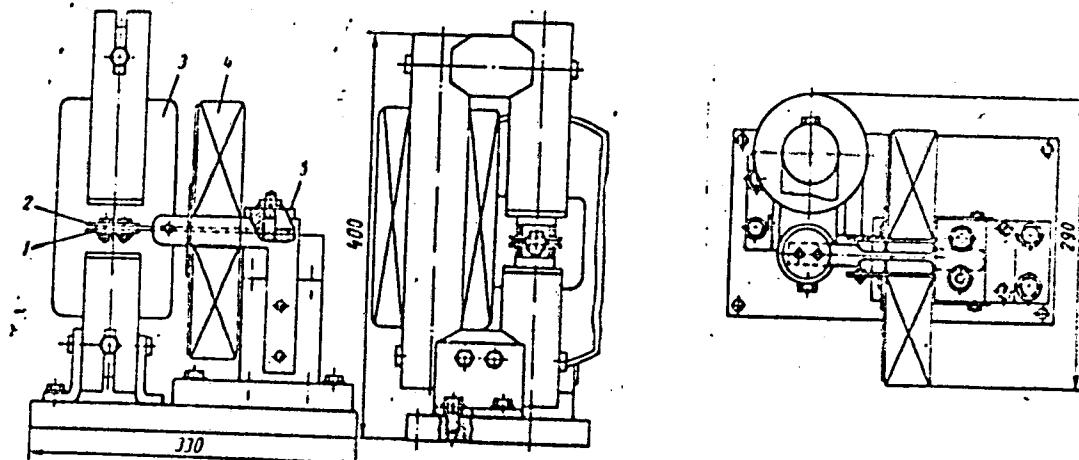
General view of the apparatus: 1 - specimen; 2 - weight;
